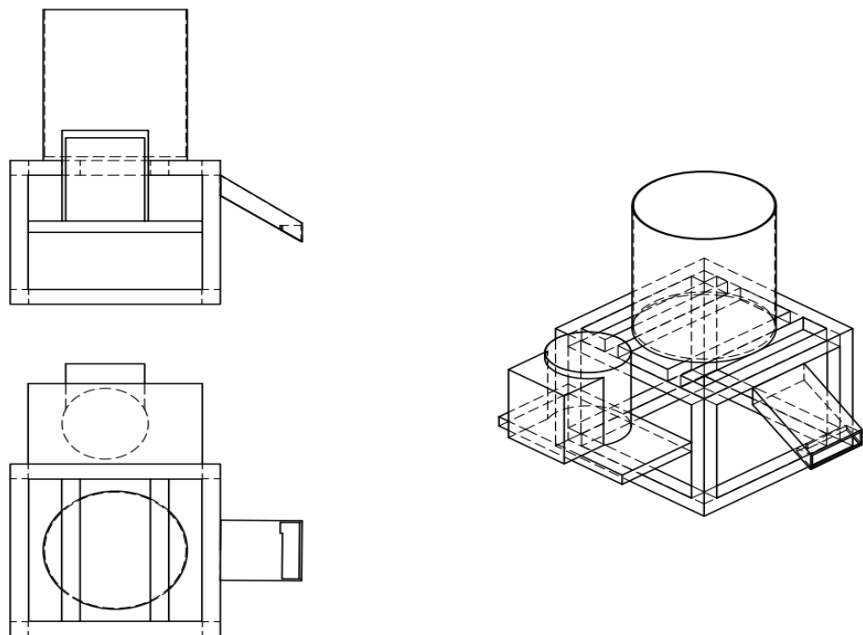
Isometric projection of jackfruit seed peeler a) Front view b) Top view c) Isometric view
